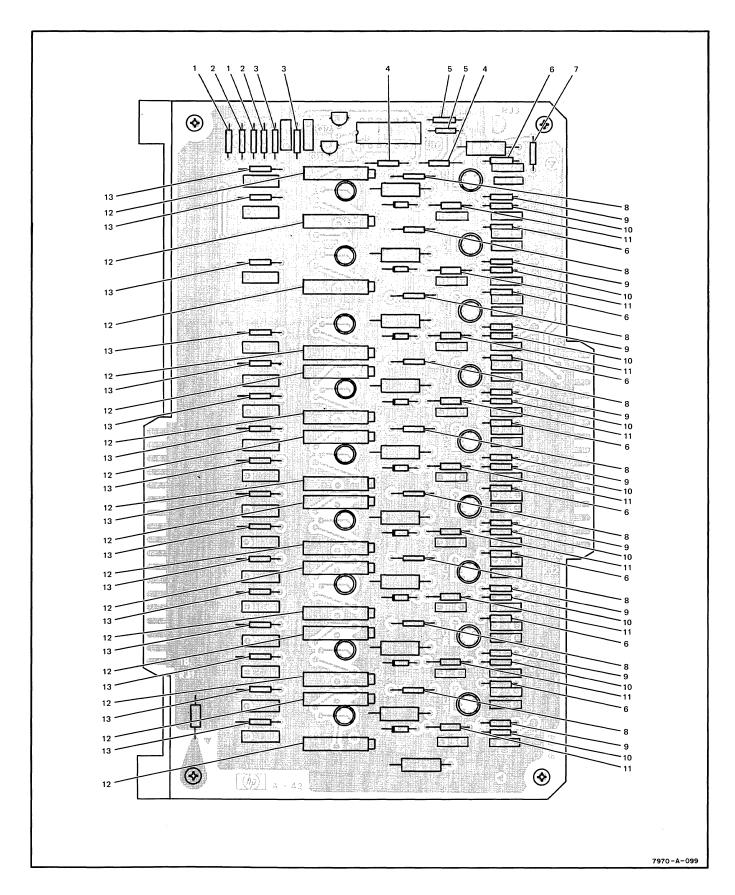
Read/Read Preamplifier PC Assembly A15 (Sheet 1 of 2)
